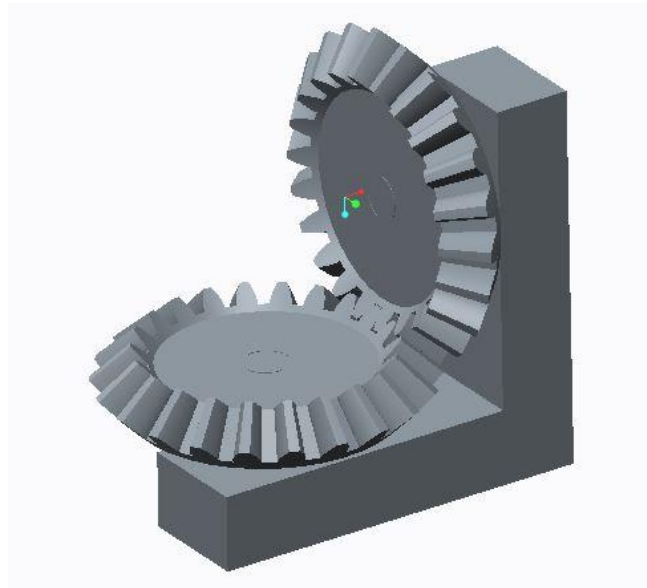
CAD model of bevel gear (Both gears: Same size)
